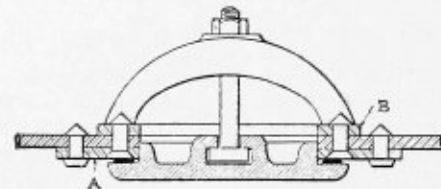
ORDINARY STEEL REINFORCING RING.
